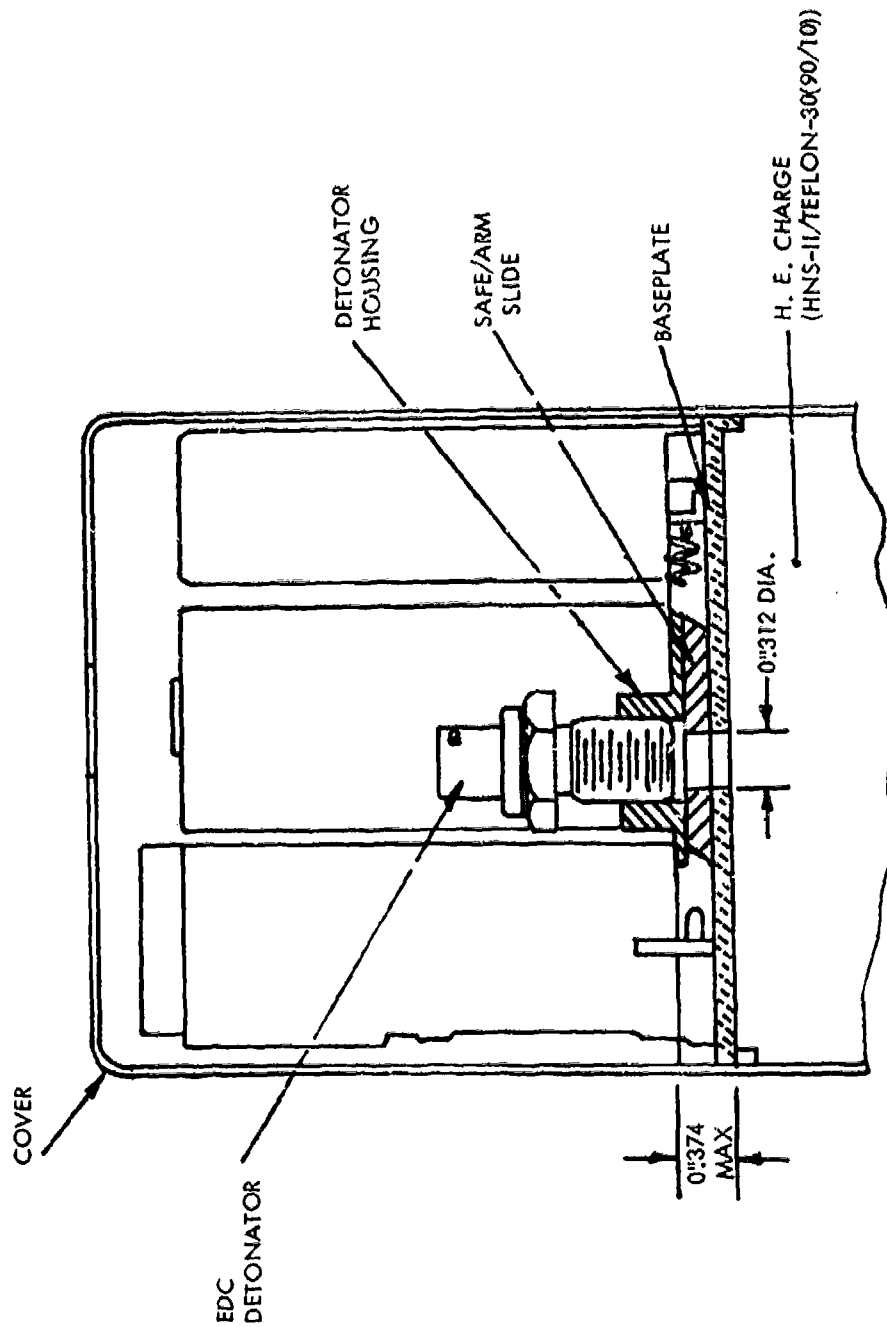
SAFETY AND ARMING MECHANISM USED IN ALSEP EXPLOSIVE CHARGES
